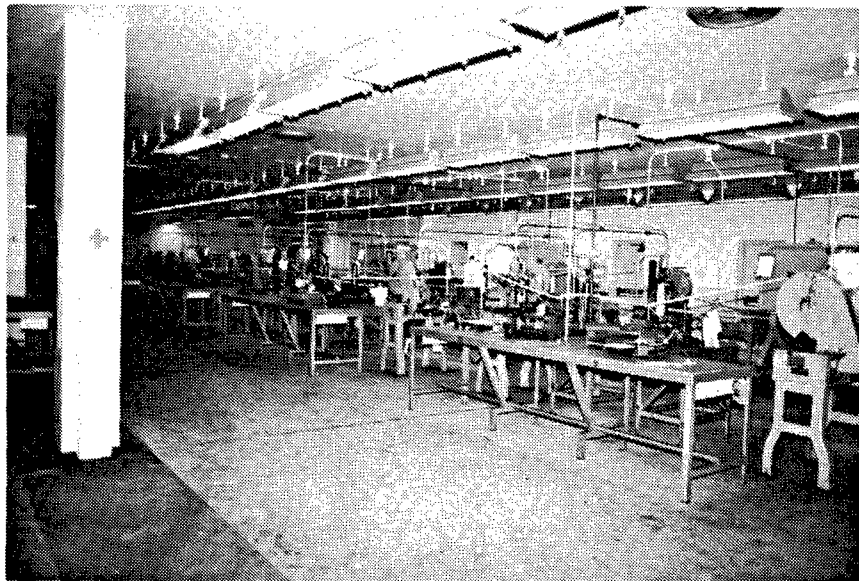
Building 135: Primer Charge and Assembly Area at the Primer Manufacturing Plant.
